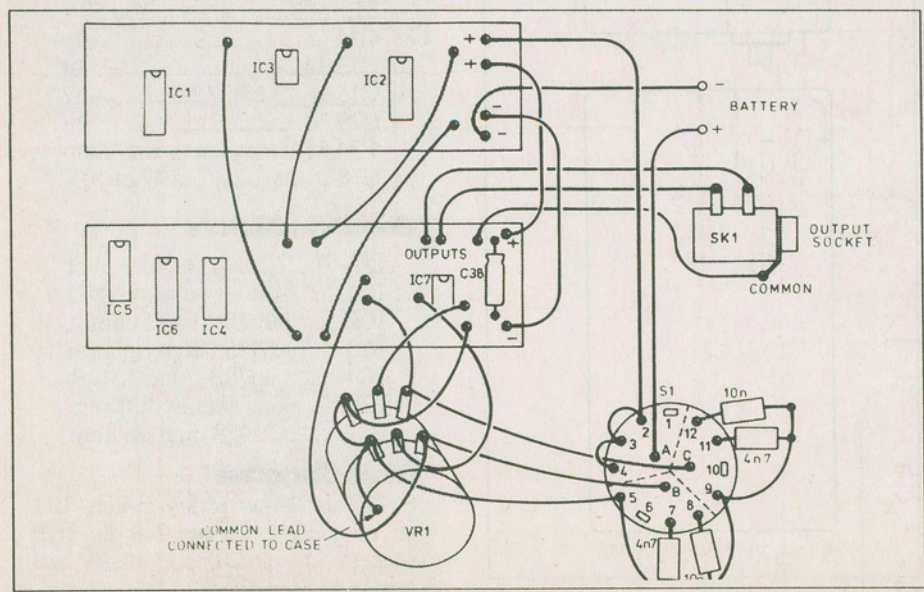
Interwiring to the boards, VR1, JK1 and S1.
